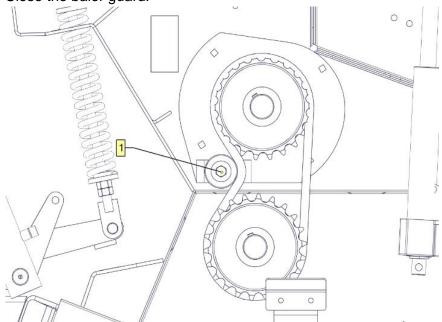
Adjusting the chain tension on the right-hand side of the baler
